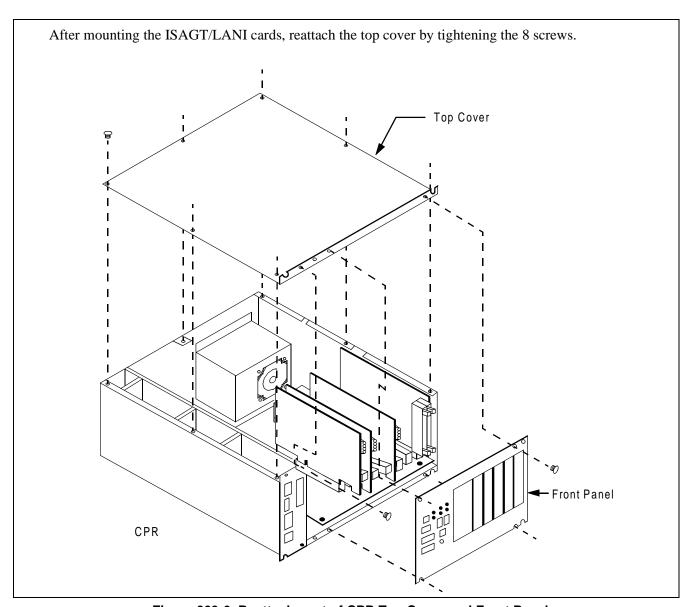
Reattachment of CPR Top Cover and Front Panel
